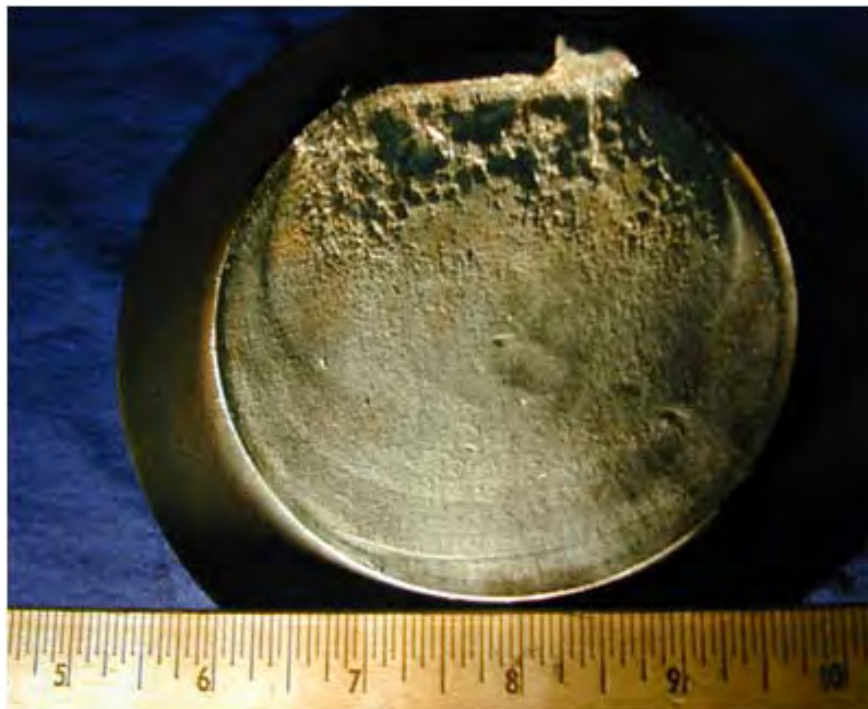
Compressor rod fracture surface showing “beach marks.”
